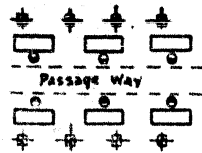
Placement of Machine Tools in Aisle in Two Rows with One Longitudinal Passageway
